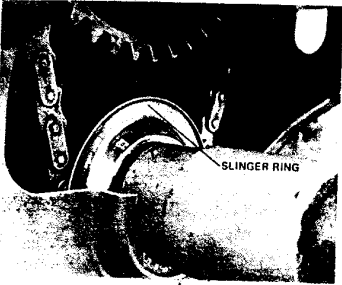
Typical slinger ring behind the front crankshaft oil seal.
